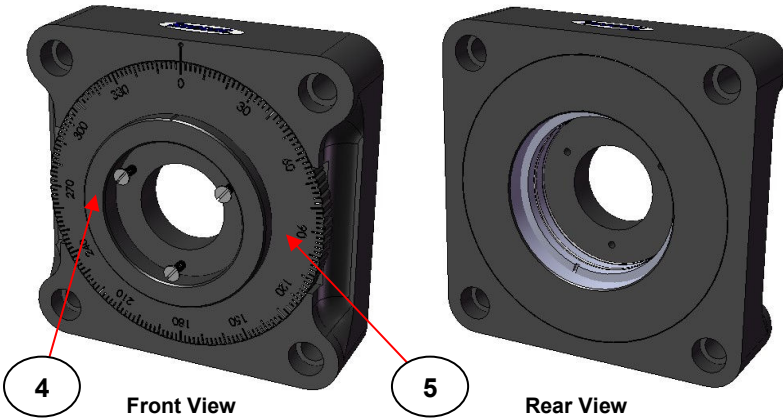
Front and Rear Views of Rotator Mount P/N GS57340 with Protective Covers Removed (No Polarizer Fitted)
